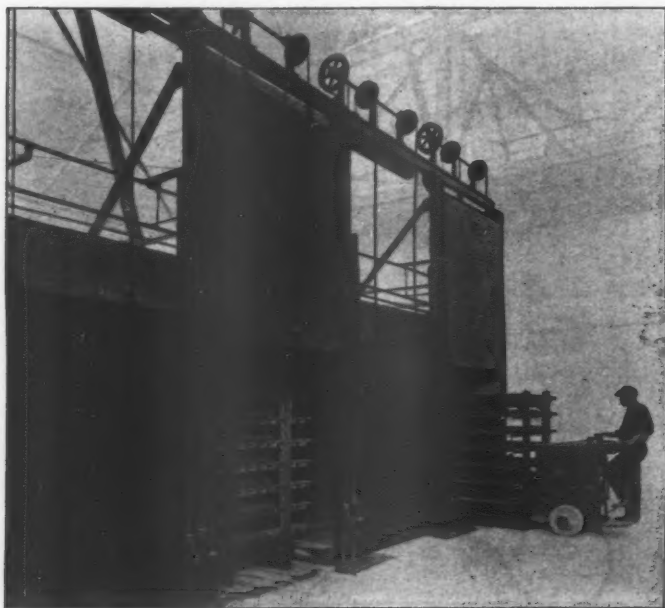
ONE OF THE OVEN BATTERIES WITH ELECTRIC TRUCK HANDLING A LOADED CORE RACK
